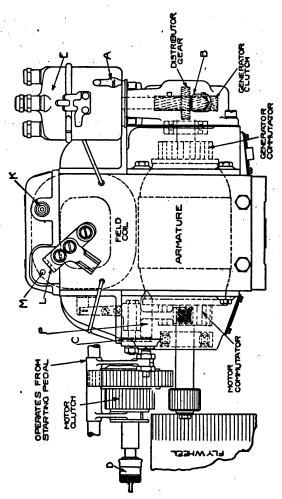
Delco Motor-Dynamo with Ignition Head.
